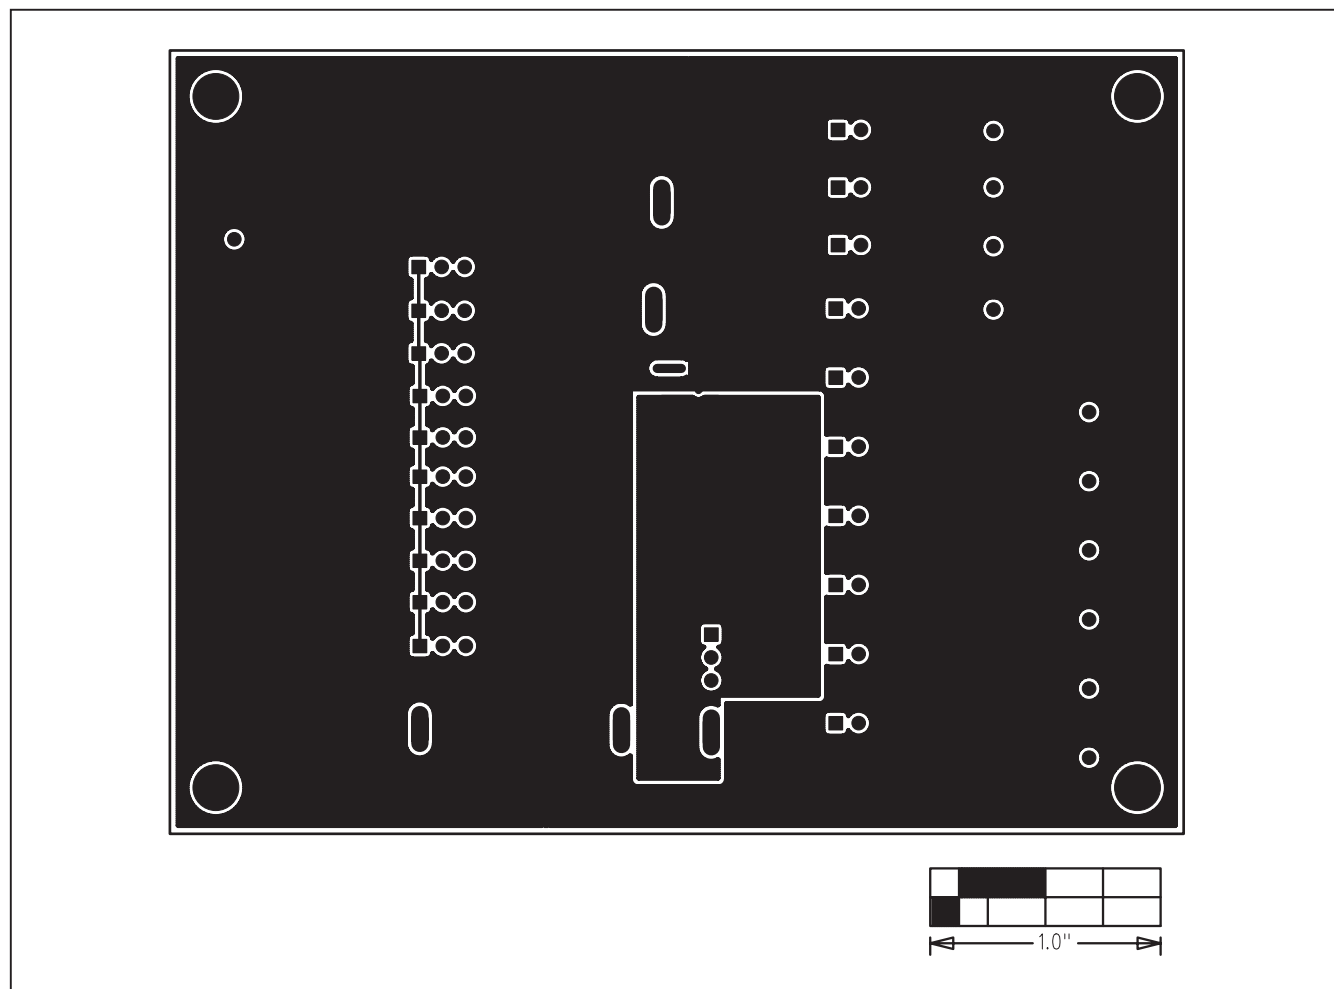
MAX17108 EV Kit PCB Layout—Solder Side
